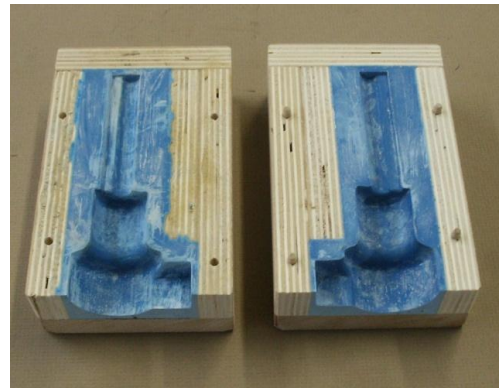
Core box just after removal of core master. Facing end cut open to allow sand to be filled into the box when both halves are clamped together.
